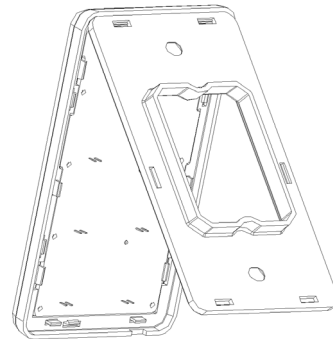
ATTACHING THE FACEPLATE TO THE MOUNTING FRAME
